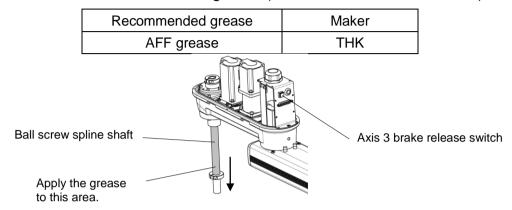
Greasing lower side of ball screw spline unit (KHL-500, KHL-600, KHL-700)
